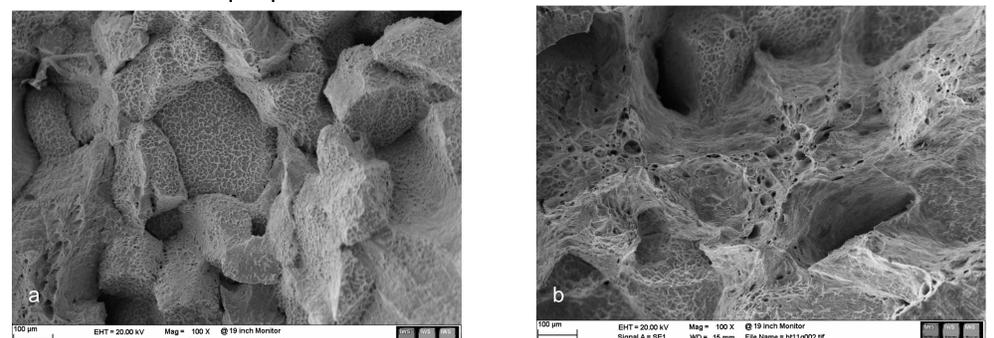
Fracture surfaces of a) austenitised and b) melted and solidified samples
